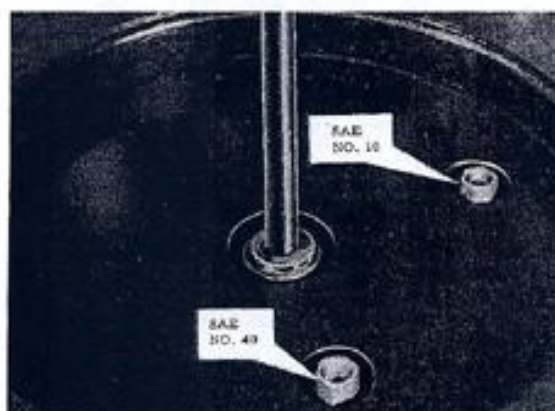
Main Cam Shaft Rear Bearing, Brake, Main Drive Assembly and Clutch Pin Lubrication Points
